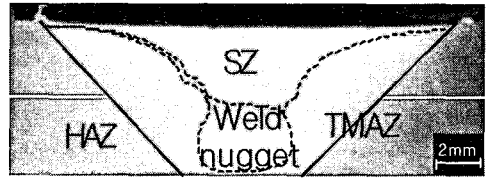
Transverse cross-section macrostructure of FSW Lap-jointed specimen
